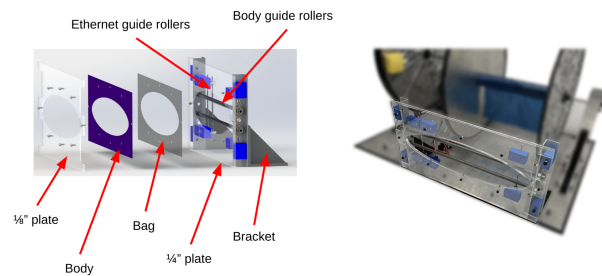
SolidWorks rendering of the intake plate assembly along with an image of the finished prototype.
